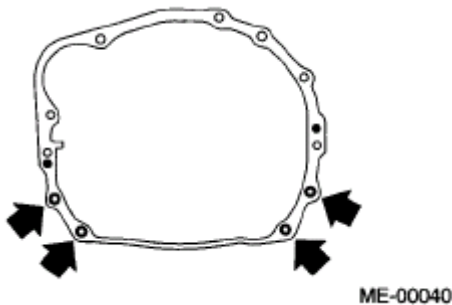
Identifying Engine Transmission Bolts - Lower Side
